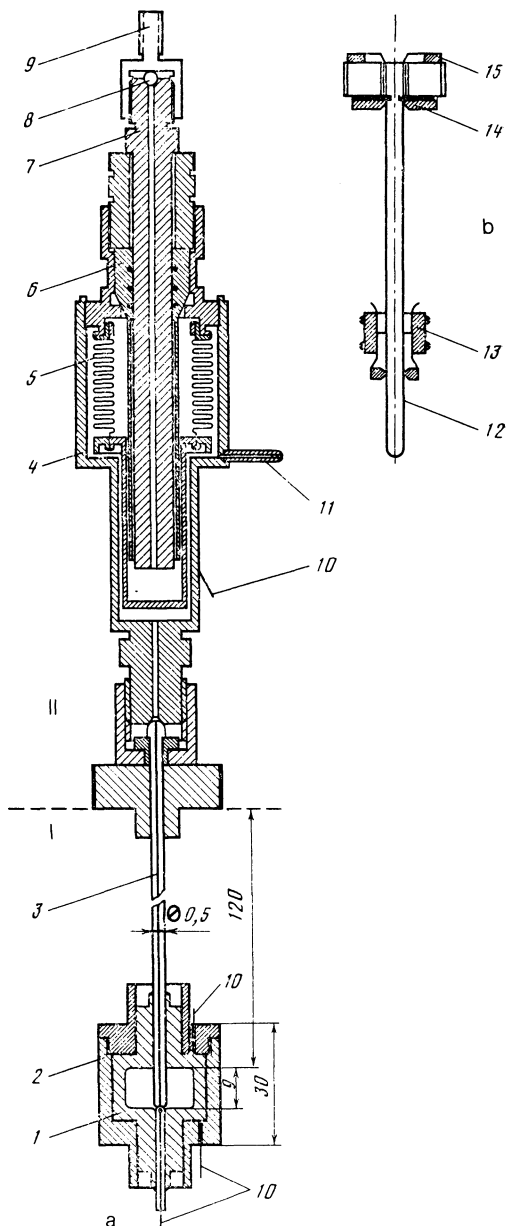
Dilatometer: 1—cell (W or Mo); 2—container (Mo); 3—capillary (W or Mo); 4—body of measuring element; 5—bellow; 6, 7—pair of pistons; 8—plug of opening for refilling with mercury; 9—place for attaching slide for wire; 10—thermocouple; 11—tube for inserting cesium; 12—mast for slide wire; 13—slide wire with contacts; 14—stationary potential contacts; 15—elastic current-conducting contacts; I—hot zone; II—cold zone.
